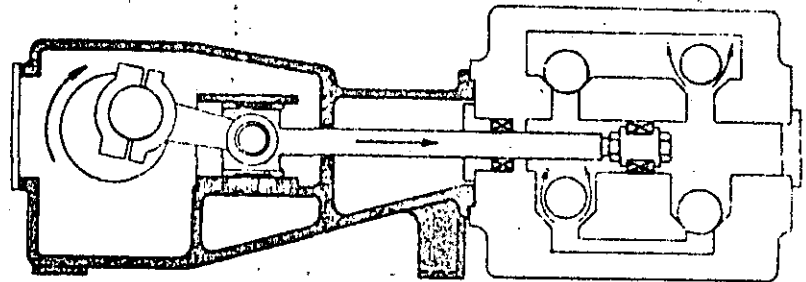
HORIZONTAL DOUBLE-ACTING PISTON POWER PUMP
